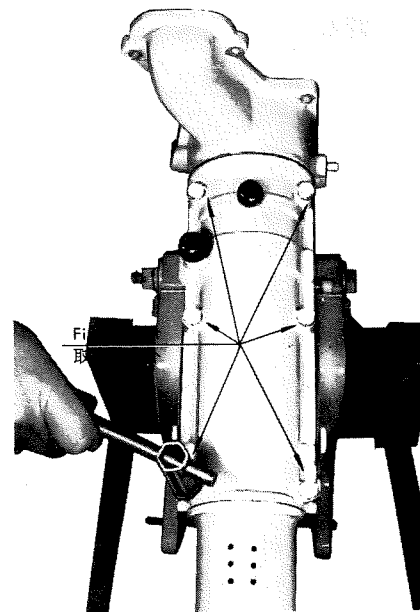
Unfixing fitting bolt for Drive Shaft housing
